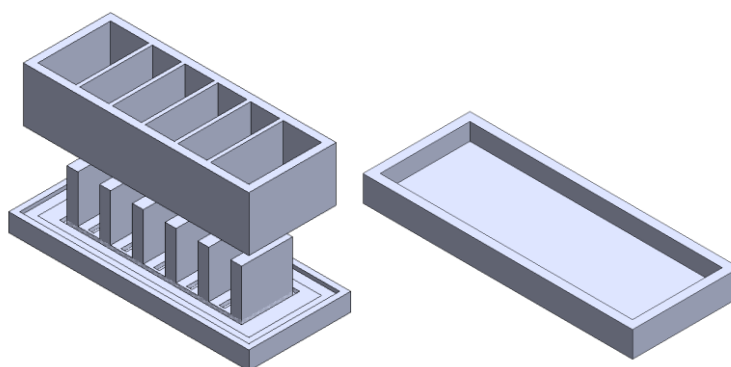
The lower inner mould, lower outer mould and base mould.
